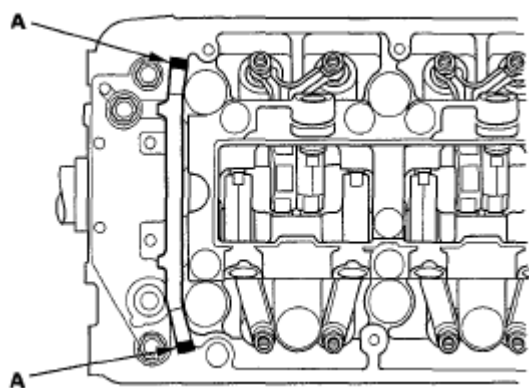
Identifying Rocker Shaft Holder Mating Areas
